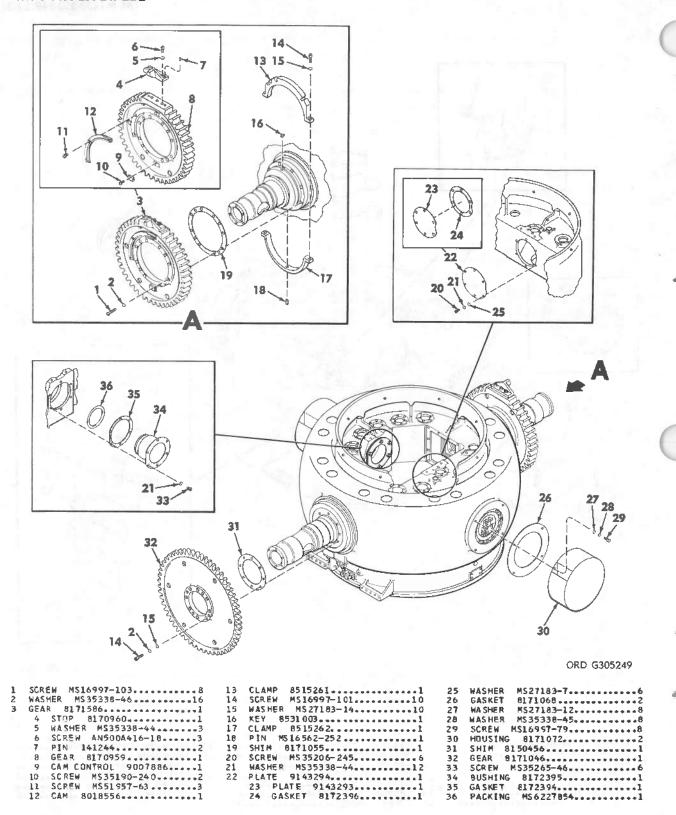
HOUSING /8171020/-PARTIAL EXPLODED VIEW
